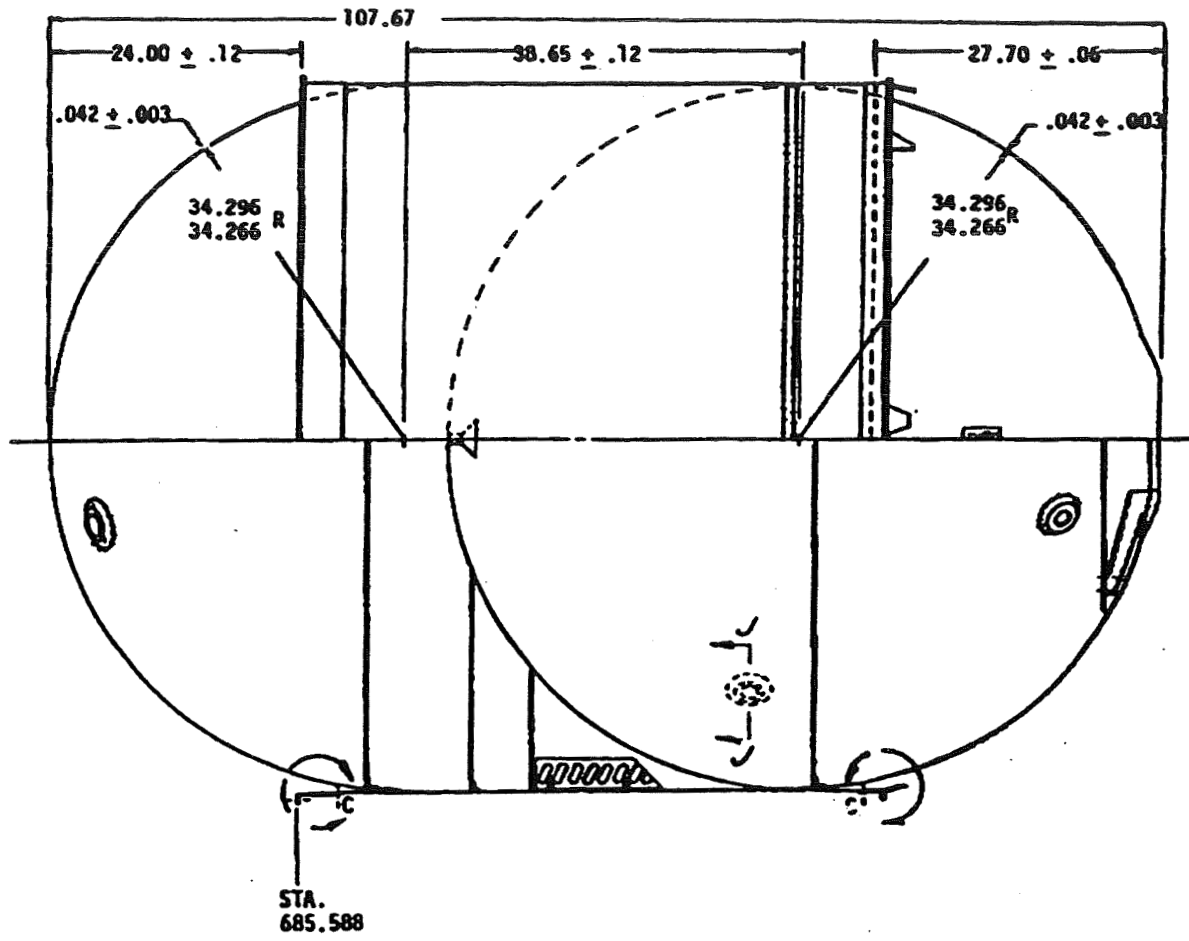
Dimensions of Delta 2nd Stage Stainless Steel Cylindrical Propellant Tank
